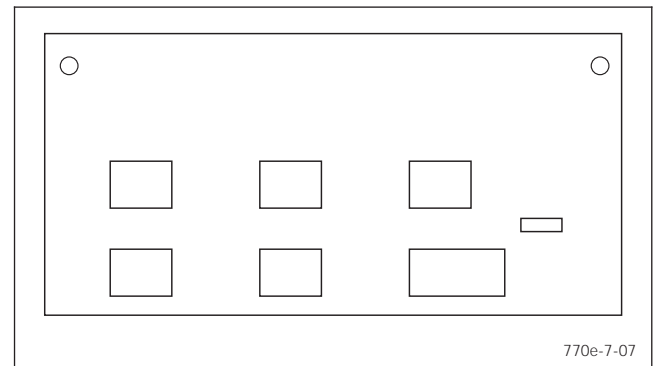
Mixed Technology Assembly, Double-Sided, Immersion Only
